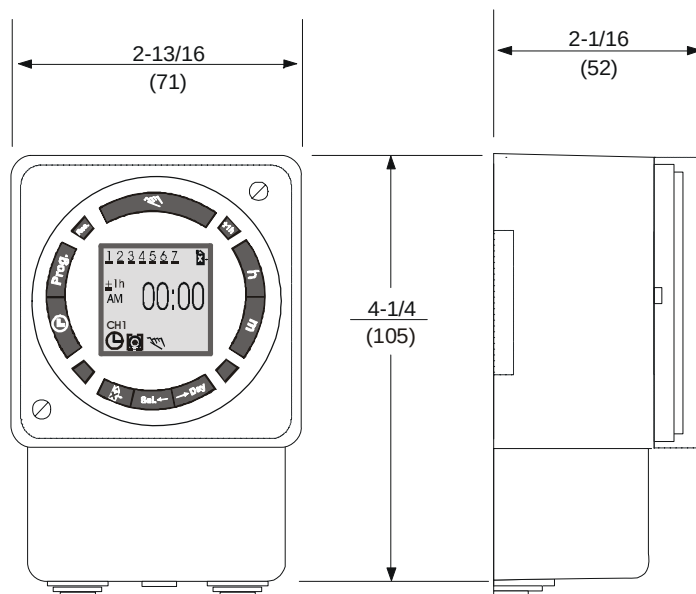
CLK350-2 Dimensions, Front View and Side View, in. (mm)
